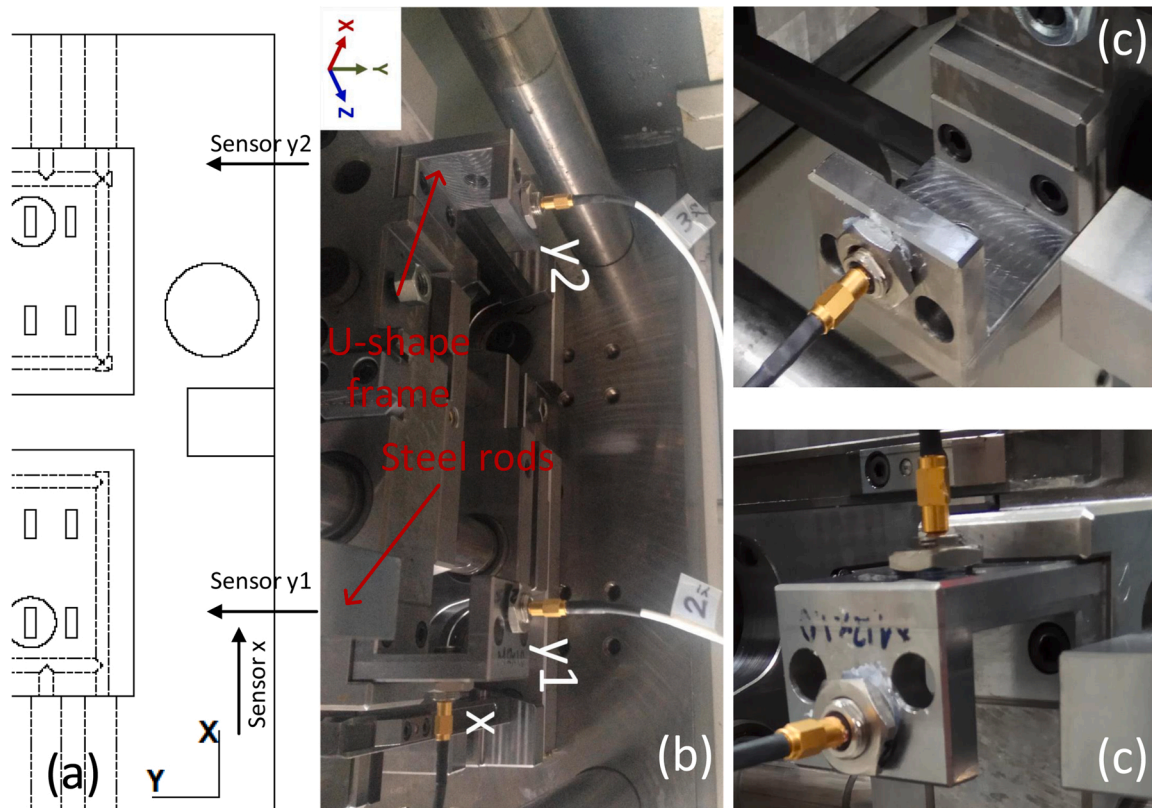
Mounting sensors with threaded bodies and locking nuts: (a) Schematic view; (b) experimental setup; (c) sensor mounts with hot glue to lock mounting threads.
